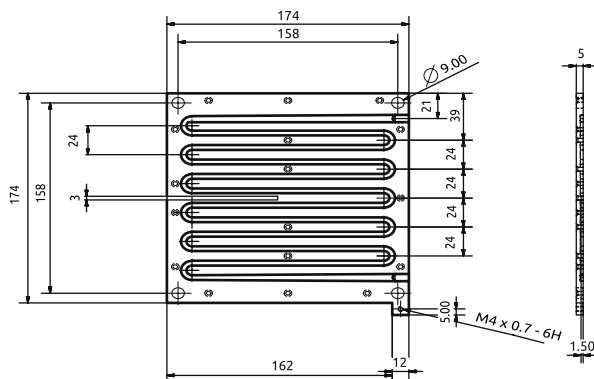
Technical design of the copper cooling plate, part (4) in Fig. 2.
